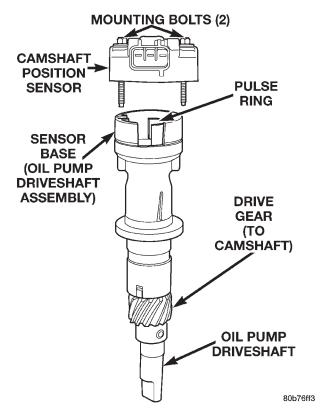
CMP and Oil Pump Drive Shaft—4.0L Engine
